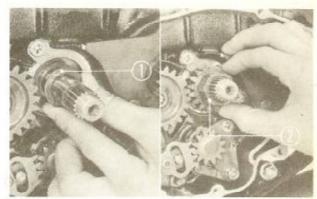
① 20 mm thrust washer ② Starter shaft
